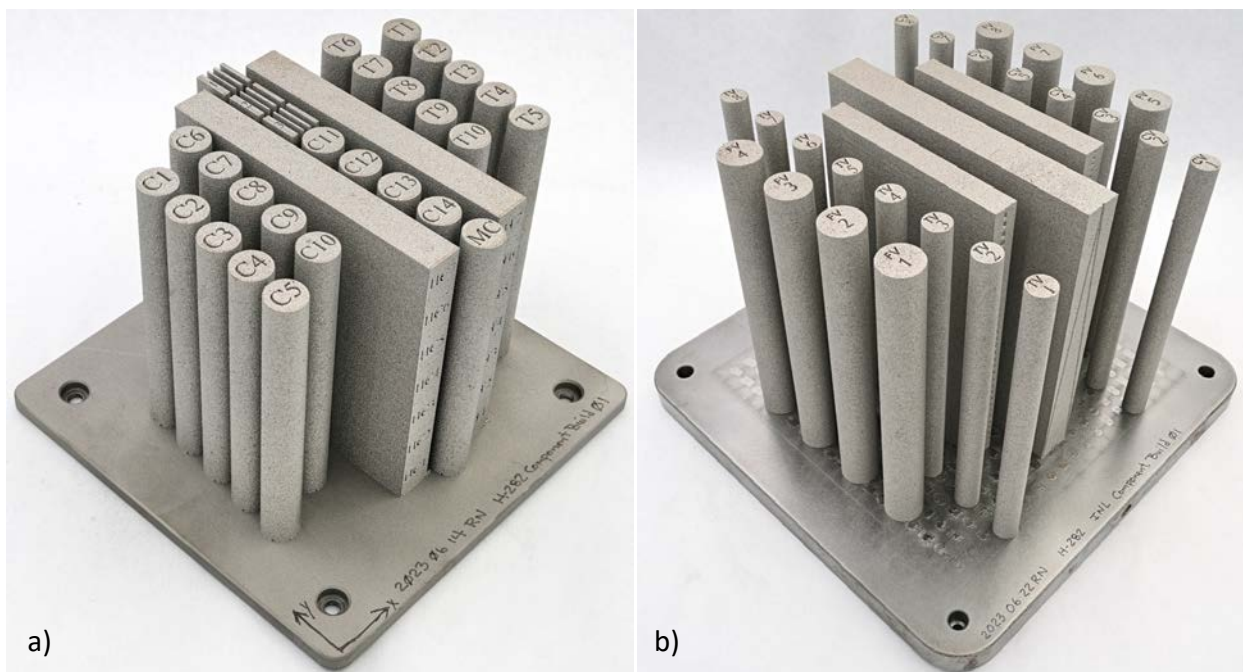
Large builds for mechanical testing: (a) ORNL build, 4 in. tall, and (b) INL build, 6 in. tall.
